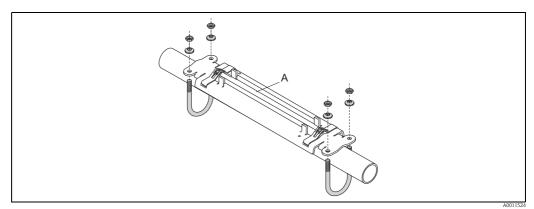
Mounting the Prosonic Flow P sensor holder (DN 15 to 65 / 1/2 to 21/2") with U-shaped screws
